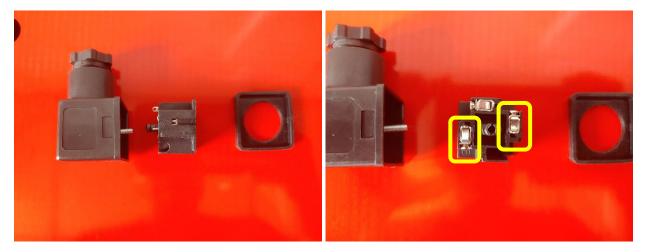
Solenoid Connector Housing, Exploded View & Terminal Identification
